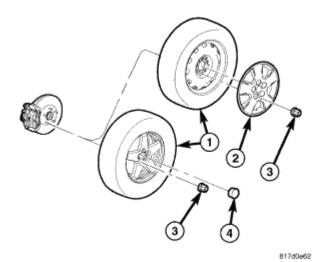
Identifying Tire & Wheel Mounting Courtesy of CHRYSLER LLC
